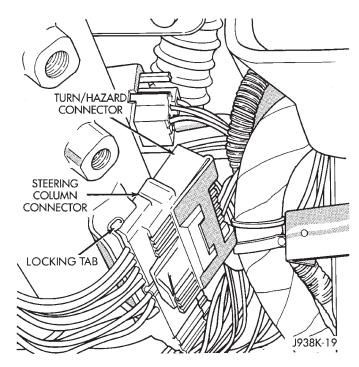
Turn/Hazard Switch And Steering Column Connectors
